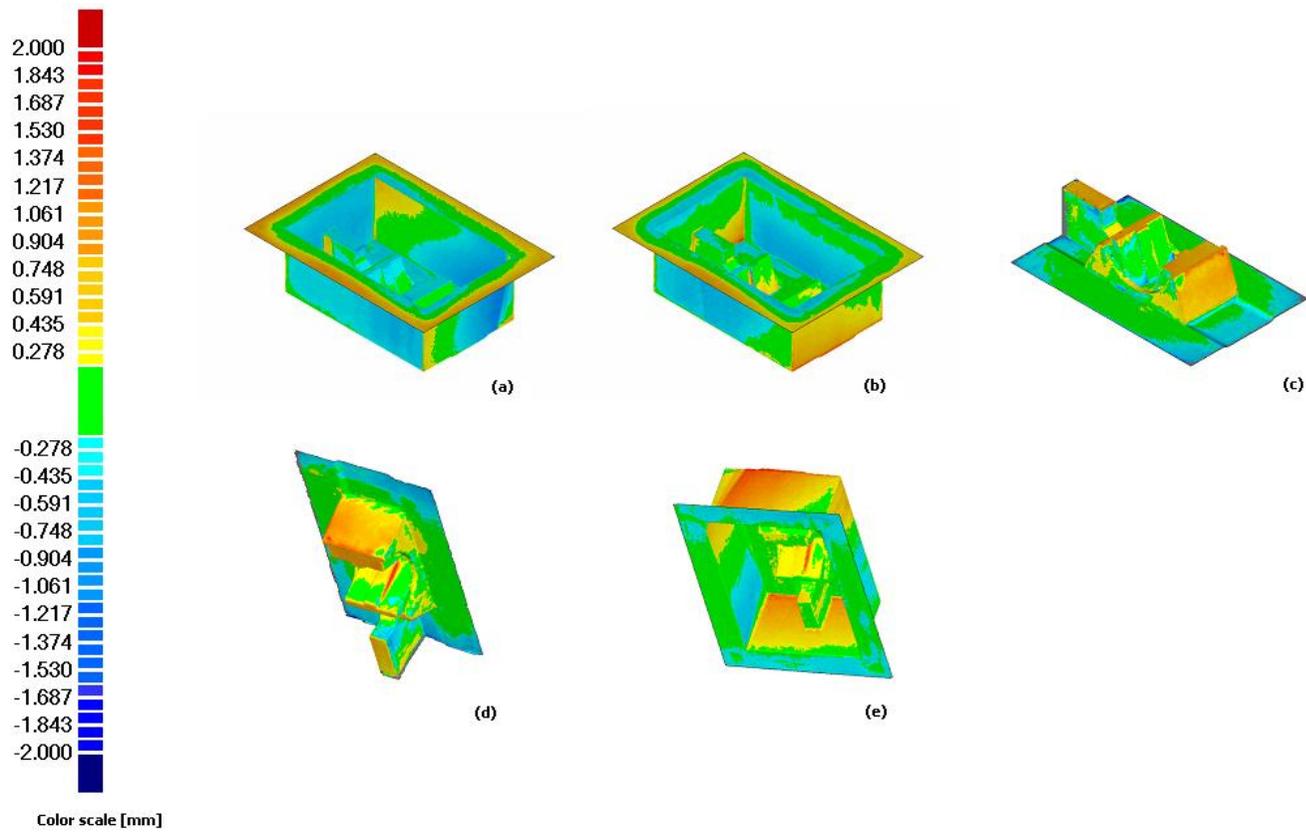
3D comparison of scanned parts with original CAD data. (a) Uncoated mould, (b) coated mould, (c) coated casting, (d) coated casting vs. coated mould, (e) Coated mould vs. uncoated mould
